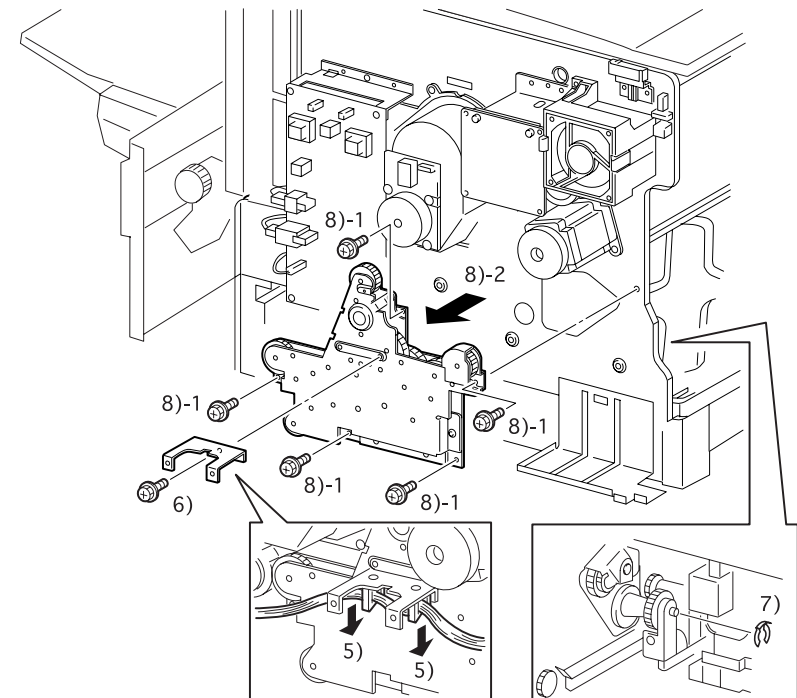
DISPENSE MOTOR ASSEMBLY Removal
